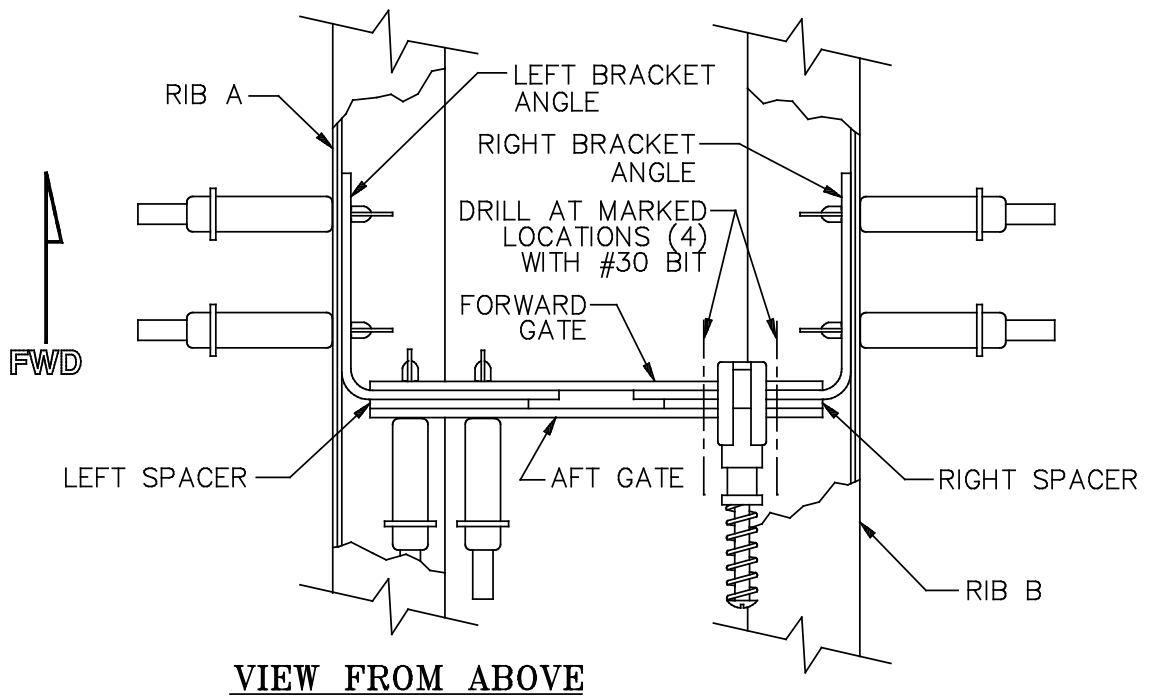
Drilling the Right-Side Trim Cable Bracket Rivet Holes
